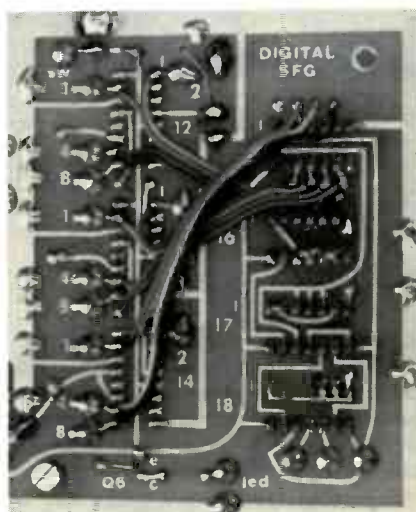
FOIL SIDE of the digital board shows wire jumpers as they appear when formed from flat cable. digital board should now look like that in Fig. 8.
